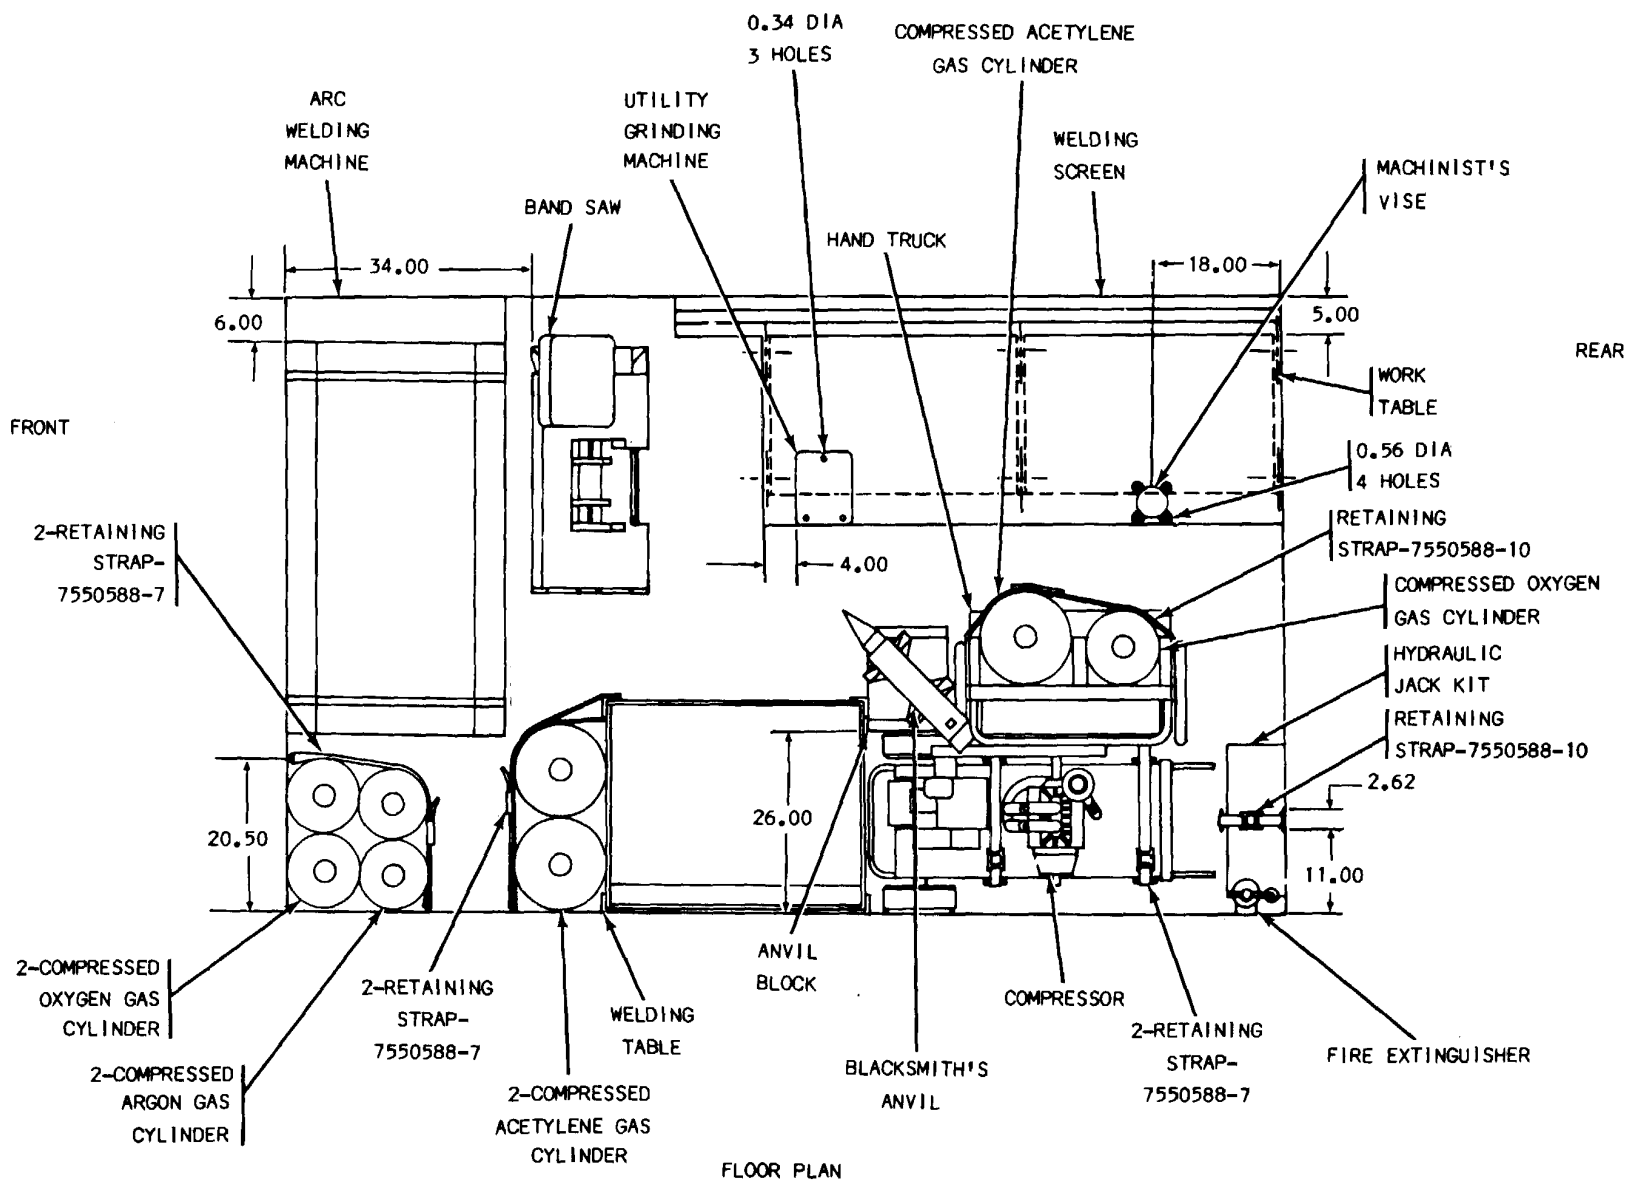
Components to be mounted, unit 1, 280, floor plan.
